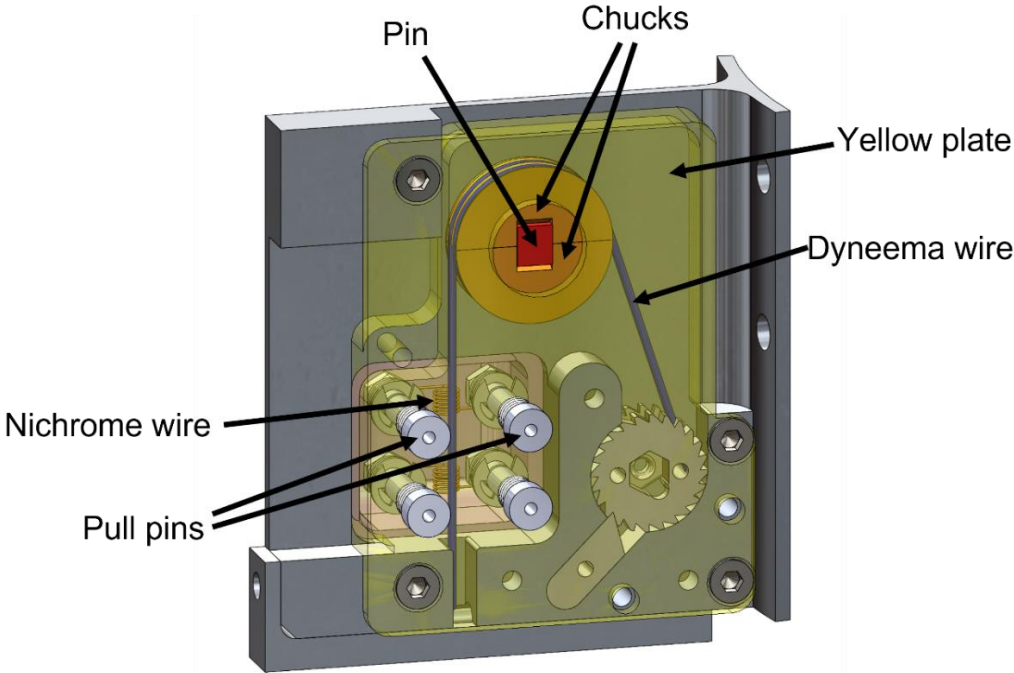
Detailed view the release mechanism for the pin locking mechanism of the SDOM lid.
